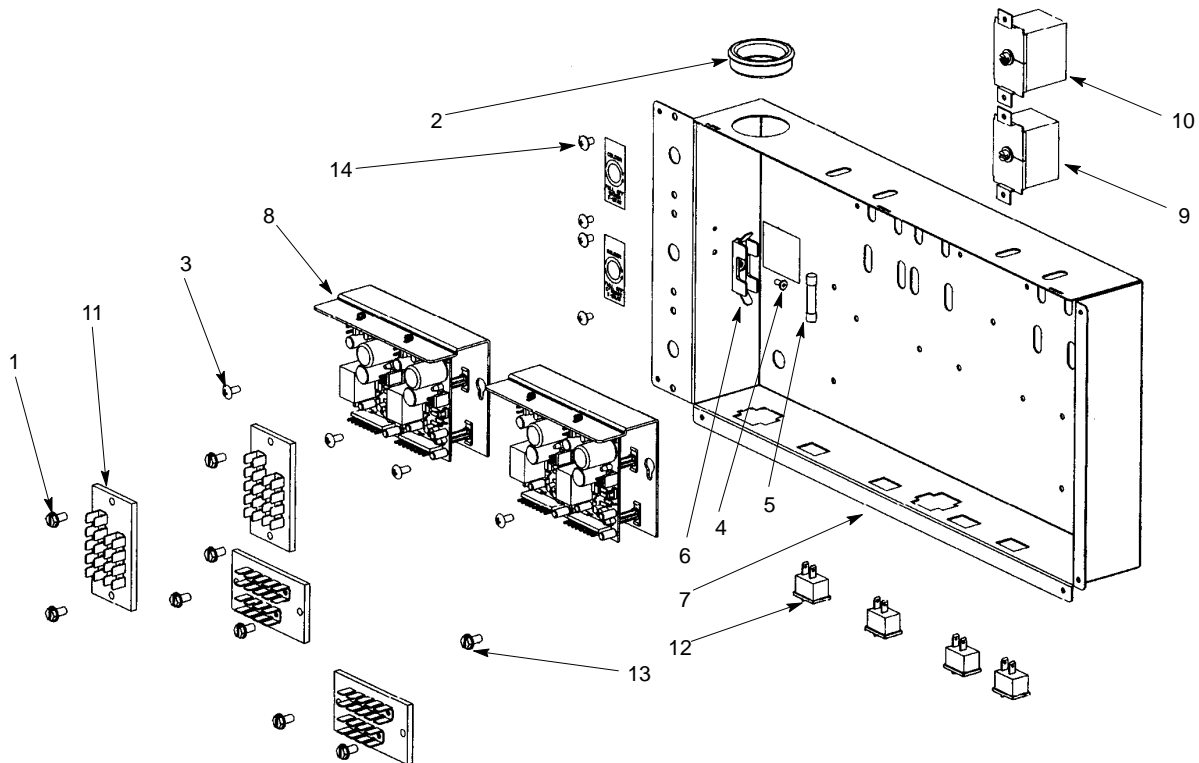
ELECTRICAL BOX (DC) ASSEMBLY
